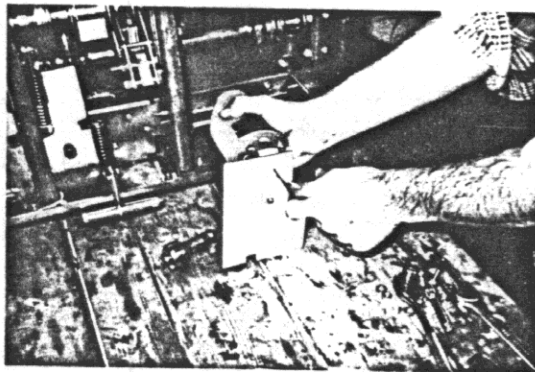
Lift Oscillator Assembly as Shown
